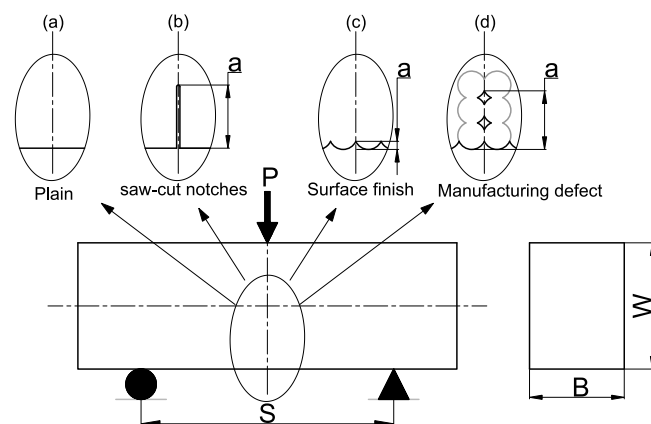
Conventional three-point bending test set-up of 3D-printed specimens that are: free of defects (a), weakened by crack-like notches (b), rough surface finishing (90° printing direction) (c), and manufacturing defects (90° printing direction) (d).
